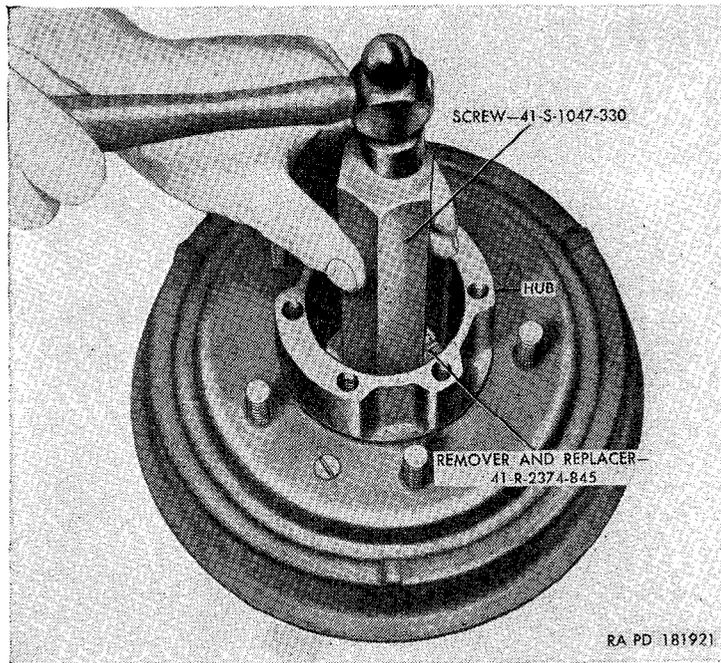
Removing front hub bearing cup, using remover and replacer 41-R-2374-845 and screw 41-S-1047-330.
